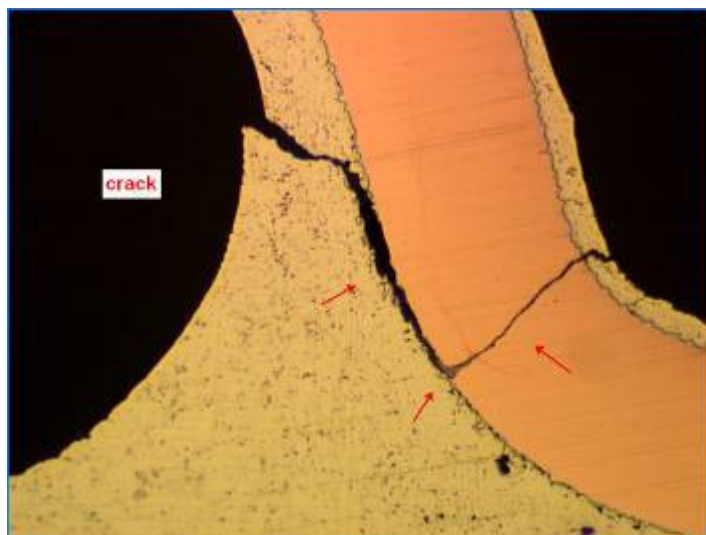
cross section, SN61, U20, right lead and solder crack, 200x
